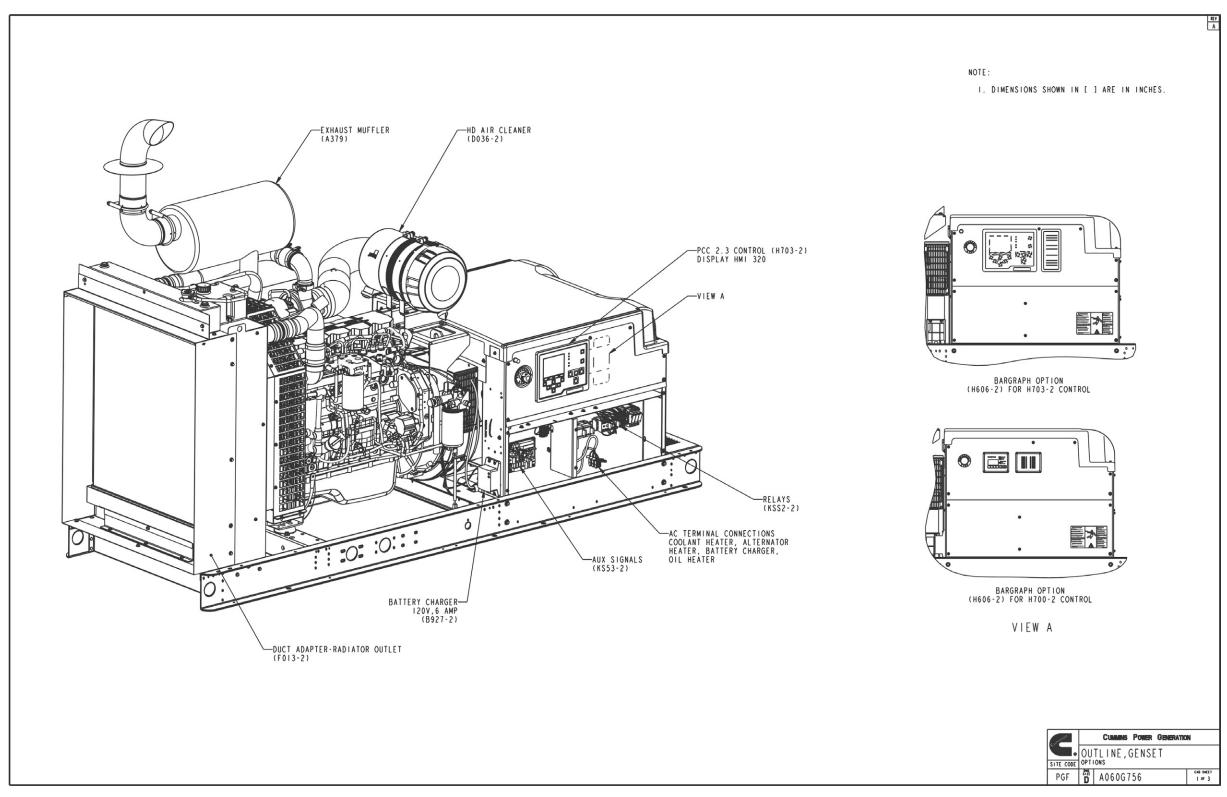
GENERATOR SET OUTLINE DRAWING, OPTIONS (SHEET 1 OF 3)
